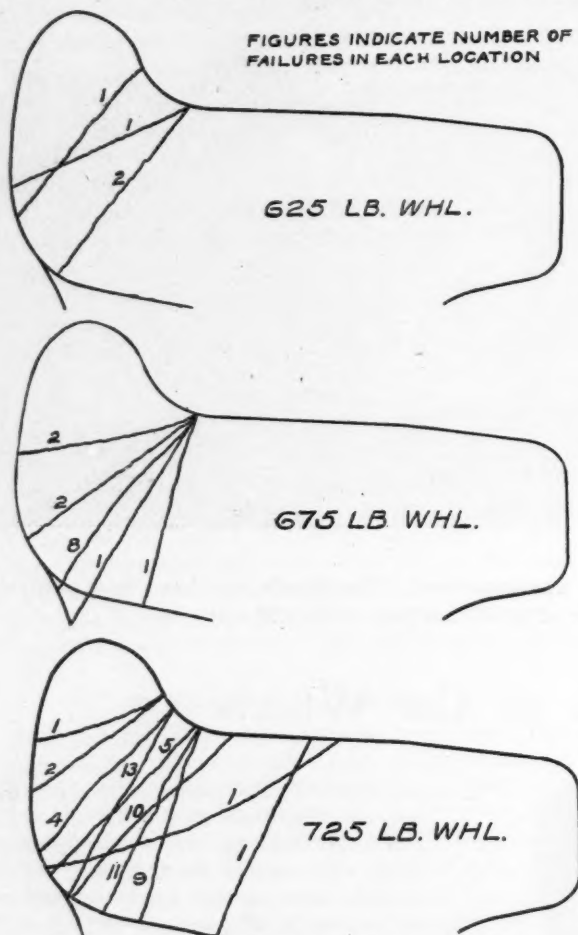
Summary of Flange and Tread Failures, Location of Failures
